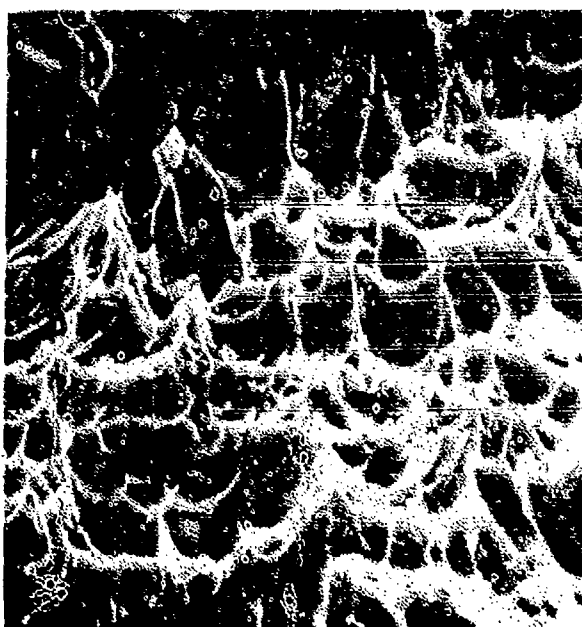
Fracture surface of AX-110 weld Charpy specimen tested at or above -18°C , 4250x.
